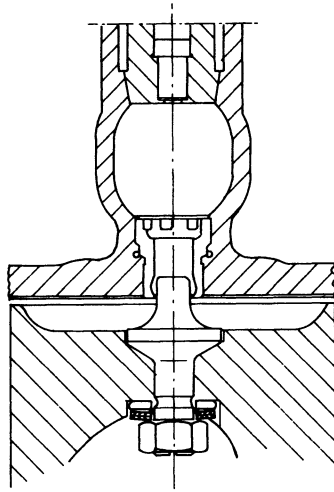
Arrangement of the variable geometry combustion chamber on the SEMT-Pielstick PA 4-185 engine
